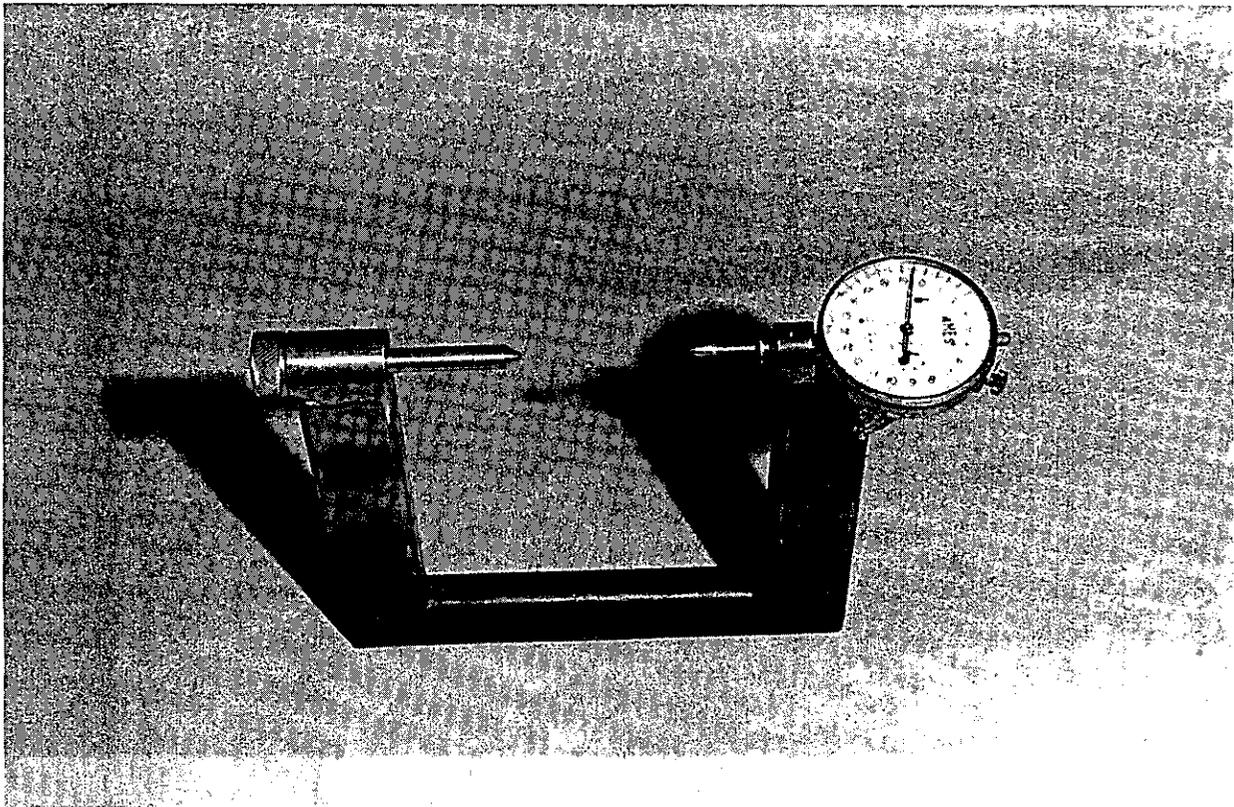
Typical "C" frame caliper for measuring cap screw lengths.
